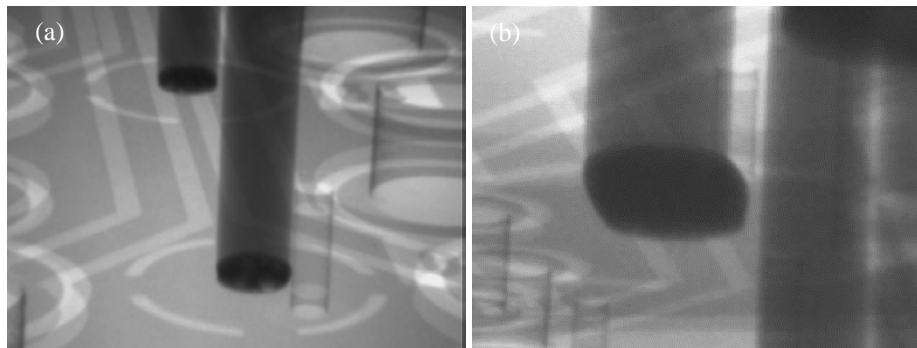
Oblique angle view x-ray of surface mount solder pads after reflow.
